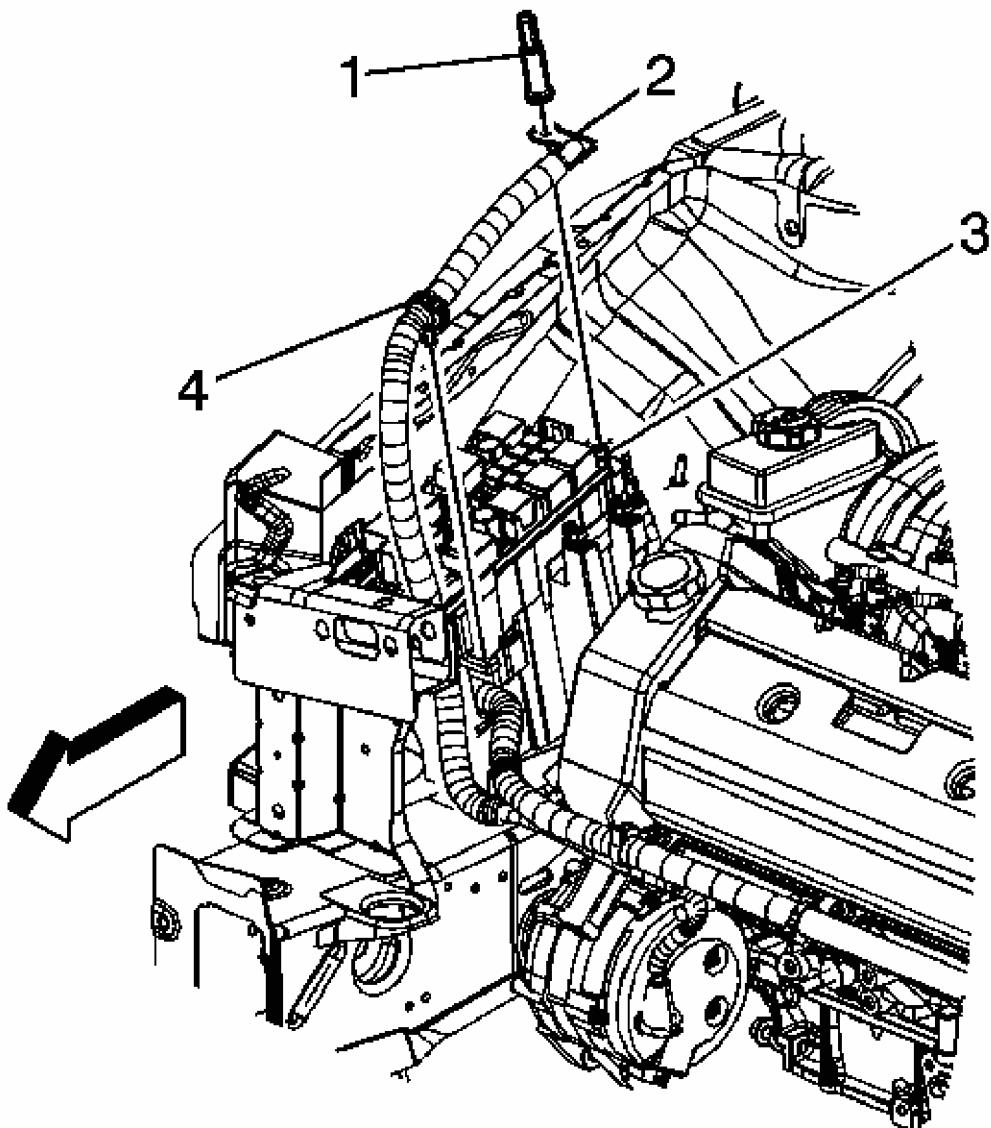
Identifying Starter Solenoid Cable To Bussed Electrical Center
